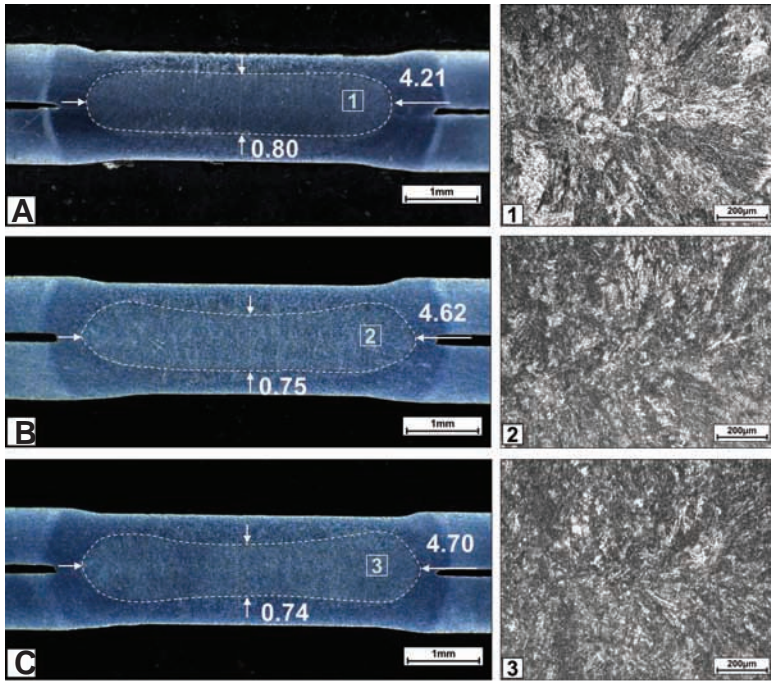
Typical cross-sectioned weld nugget and the microstructures in the weld nugget. A — Traditional weld; B — MA weld under a single permanent magnet; C — MA weld under a pair of permanent magnets (welding current, 6.0 kA; welding time, 150 ms; WD, 3 mm).
